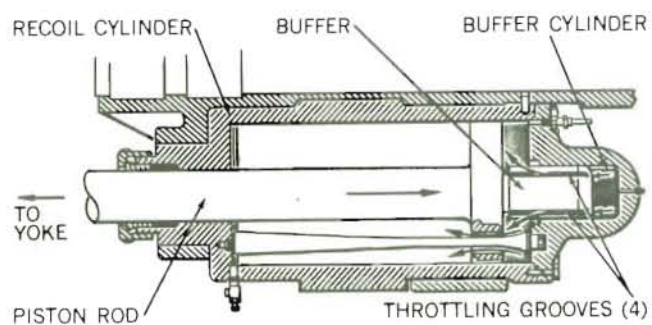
D. 16-inch Gun Assemblies. Recoil Buffing Action During Counterrecoil.
